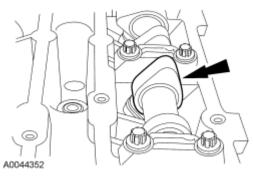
Locating Camshaft Lobe Courtesy of FORD MOTOR CO.
